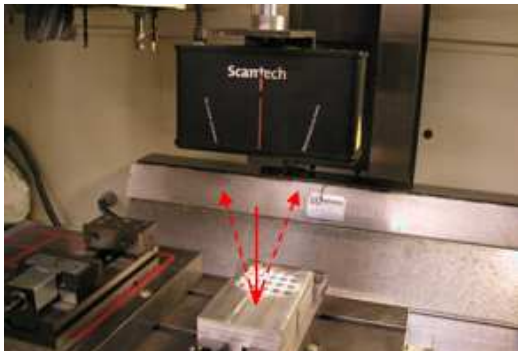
Non-contact measurement of burr with a Scan tech laser system
